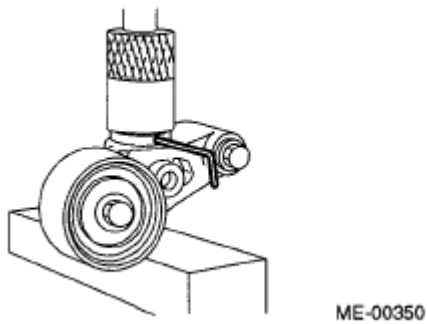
Securing Adjuster Rod Using Hex Wrench
